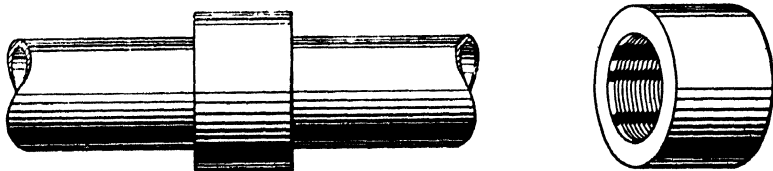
COUPLING, PRODUCED IN STANDARD SIZES.
